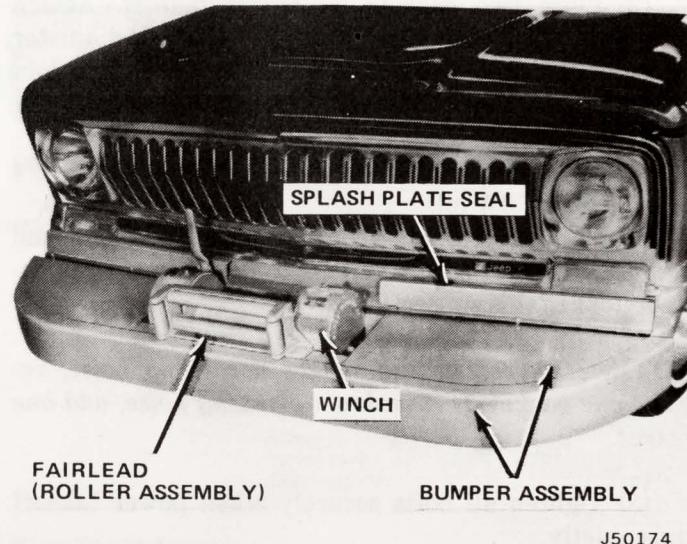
Typical Winch Installation—Cherokee Model Shown
